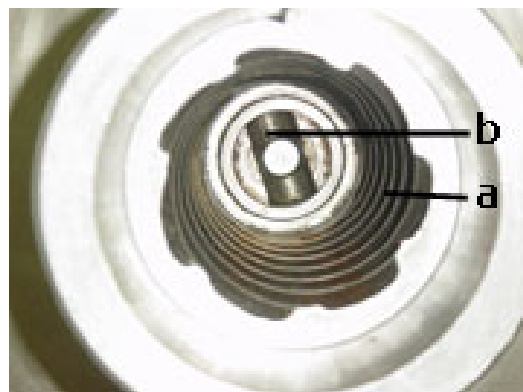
Feeding auger housing: Critical areas for cleaning are the thread (a) in the housing and the connection point of feeding worm and drive shaft (b)
